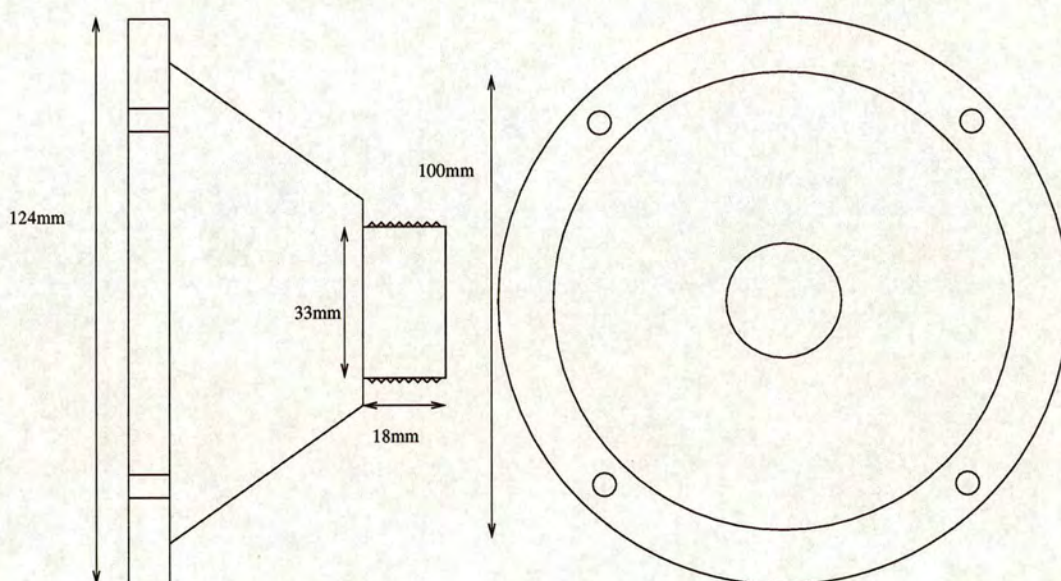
Loudspeaker adapter for mounting a cone speaker on the horn thread mount piece.
